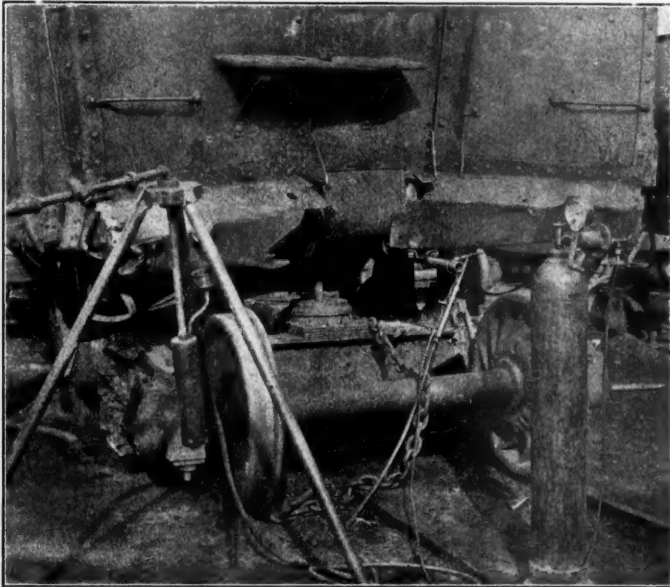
Oxygen Tank, Torch, Etc., Used with Oxy-Acetylene Cutting Apparatus.
